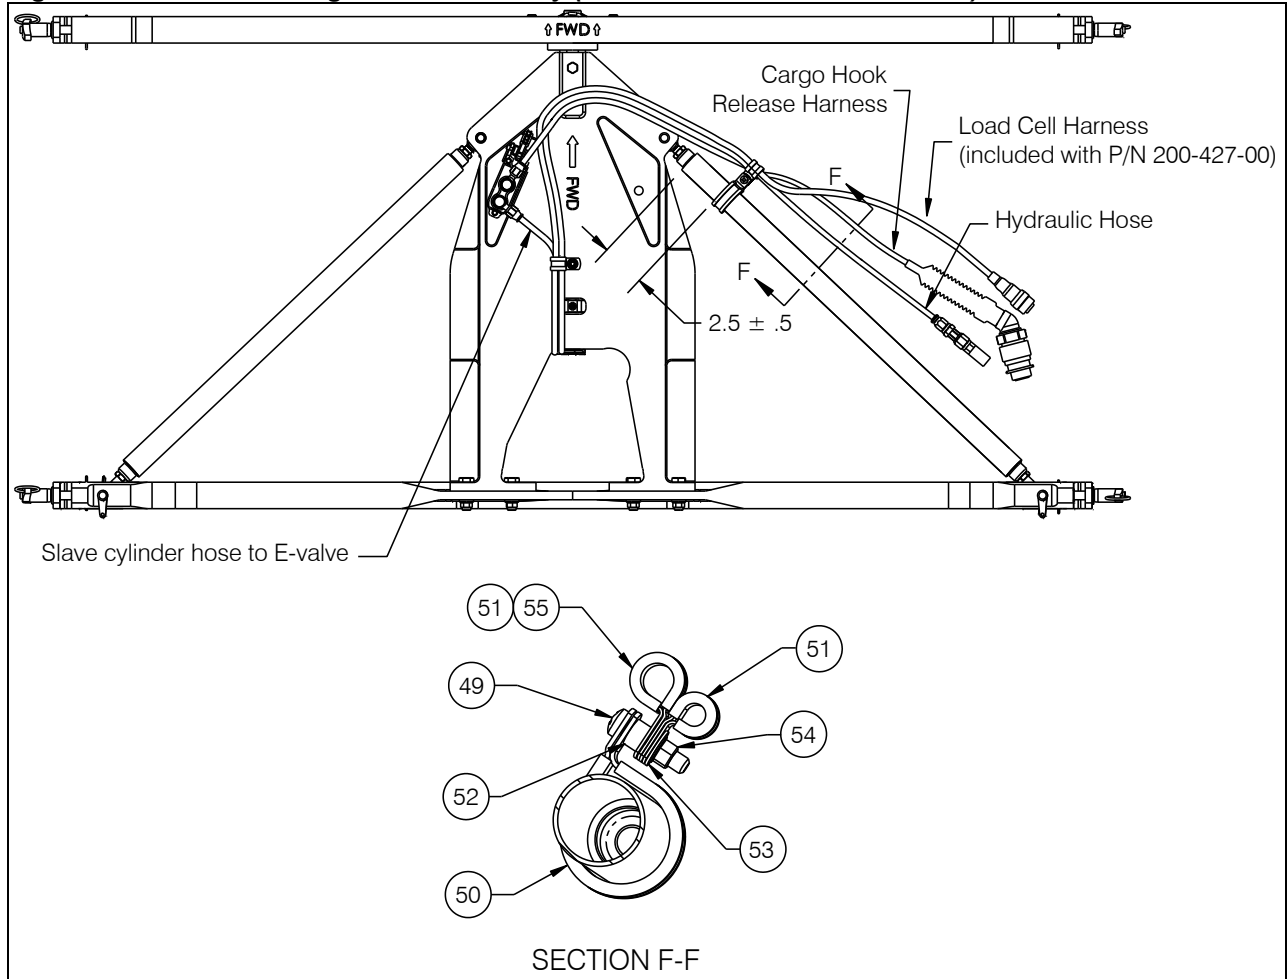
Frame and Cargo Hook Assembly (P/N 232-255-00 and 232-255-01) Parts *continued
